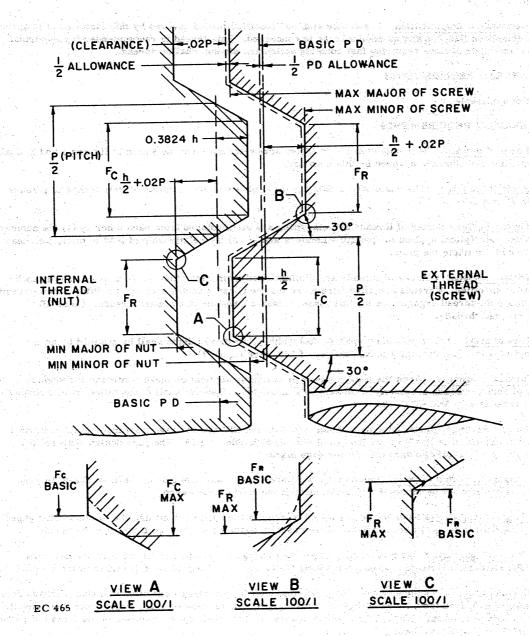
Basic dimensions - Class 2A and 2B threads. The dashed line indicates an allowance. Nut and screw threads have been separated for clarity.
